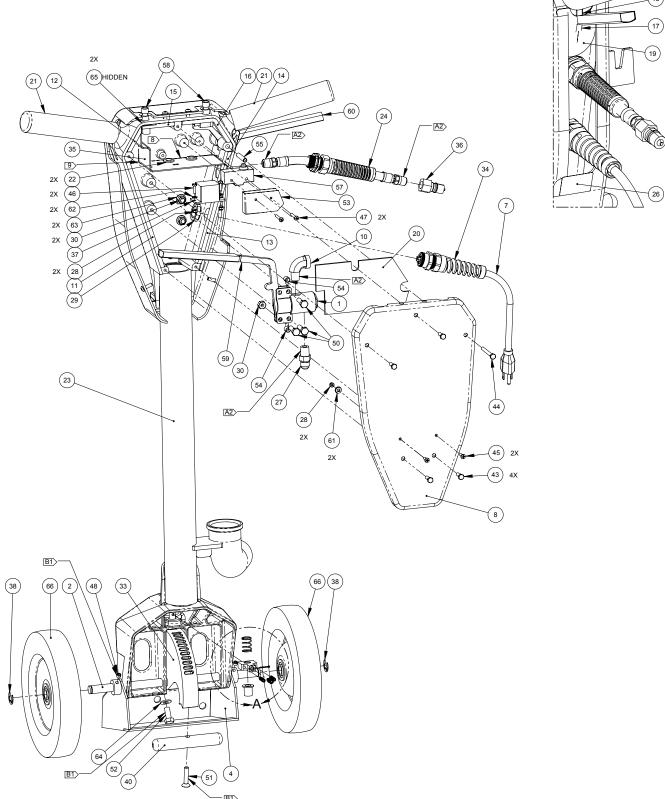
Upper and Lower Handle 115V/60Hz CSA Assembly - View 2 of 3 604-051-114 Rev. A
